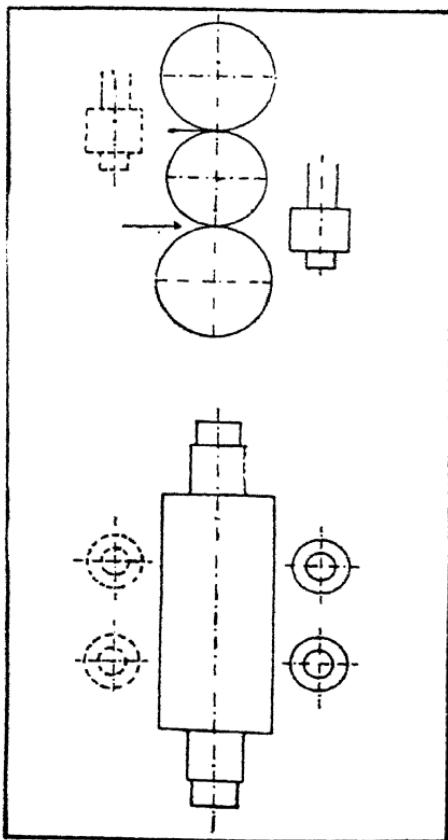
Skeleton Sketch of the Roll Arrangement for a Universal Mill
